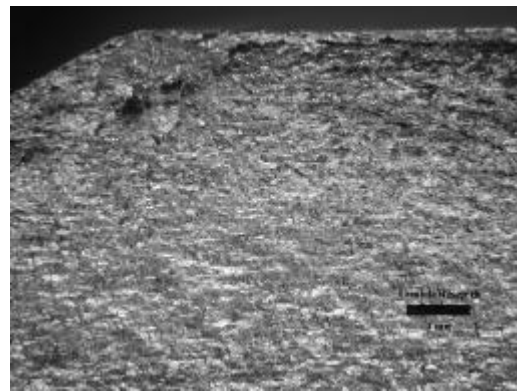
Fracture face for Milled + 100 hr. Salt Exposure specimen showing surface initiation at corrosion pit adjacent to weld.
